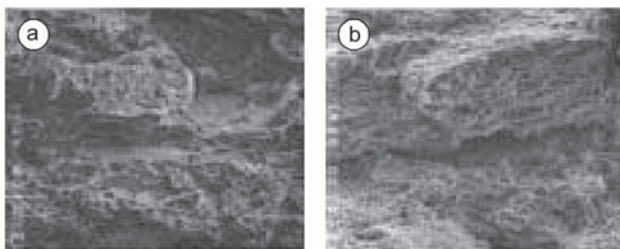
Fracture appearance of as-welded samples, SEM, 540x: a) un-vibrated during welding, b) vibrated during welding [9]
